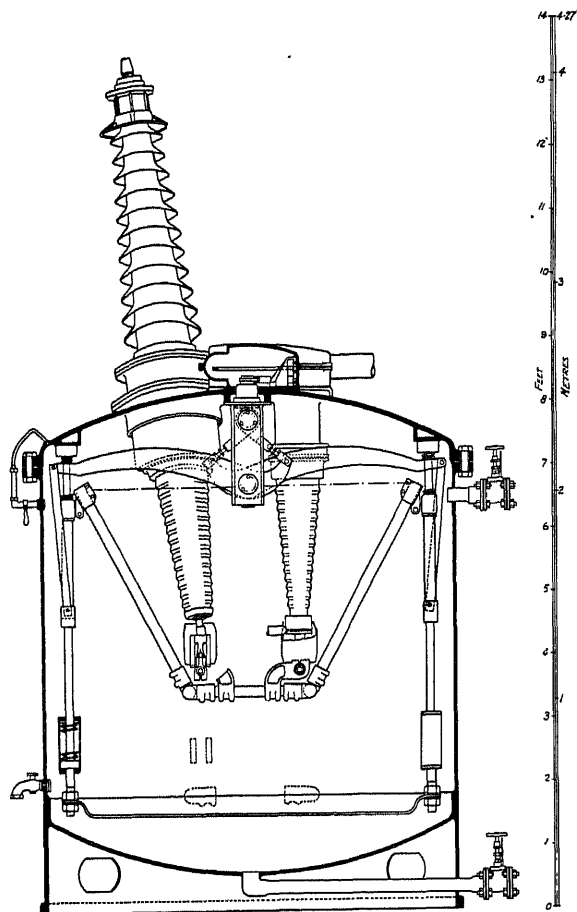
Cross section outdoor type circuit breaker for 132 kV and 1500 000 kVA breaking capacity.—Four breaks per phase—Welded steel tank and top plate to withstand hydraulic test pressure of 200 lbs./sq.in. (14 kg/cm²)—Condenser type bushings—Special operating gear.
